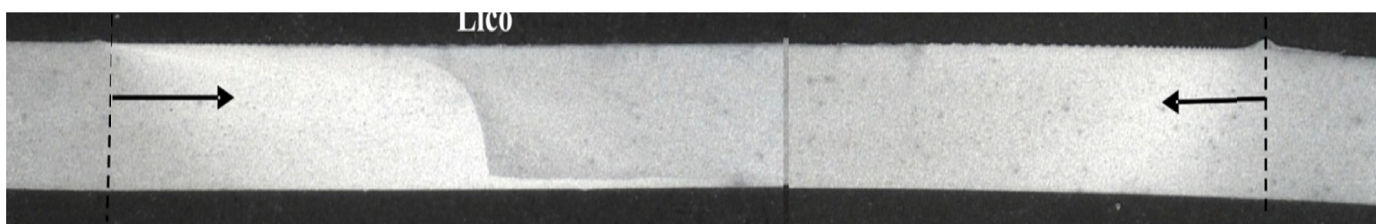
Transverse view of the weld made with a ceramic tool WT3 joint of AA 2024 T3 sheet of 1 mm thickness using ceramic tool with smooth shoulder at 1000 rpm and welding speed 200 mm/min (No. 5)
